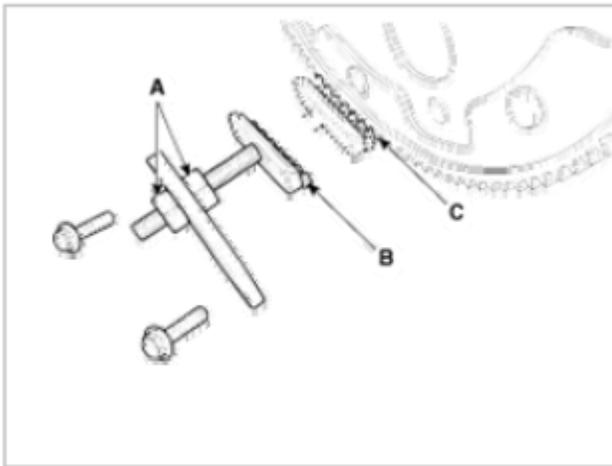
Locating Holder Nuts, Front Plate Holder And Ring Gear
